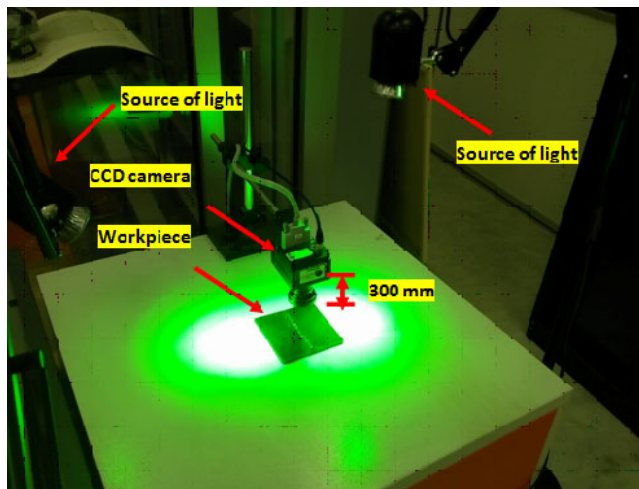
Butt welding imperfection joint system set-up
